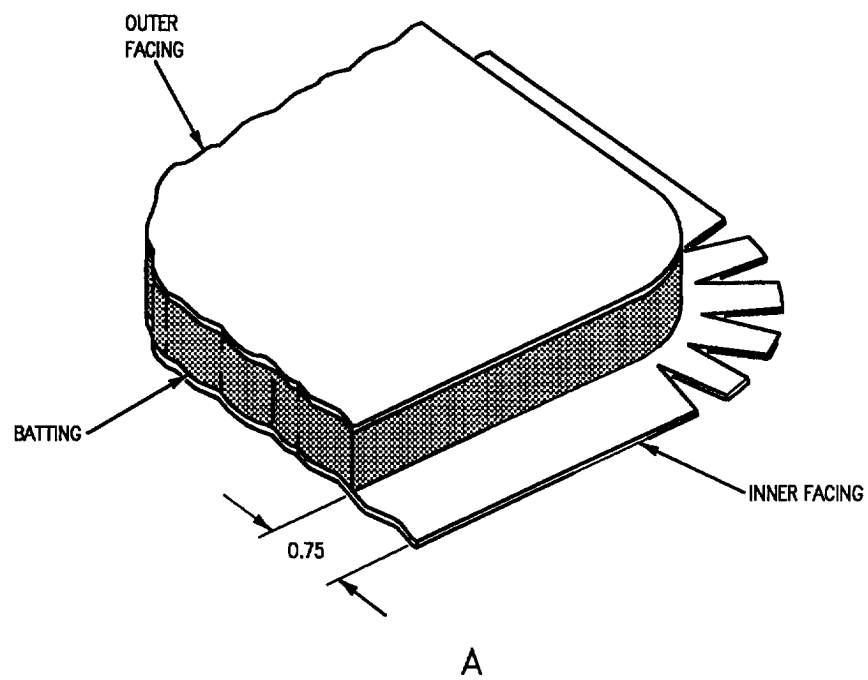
74A802608 Blanket Replacement (Sheet 1)
